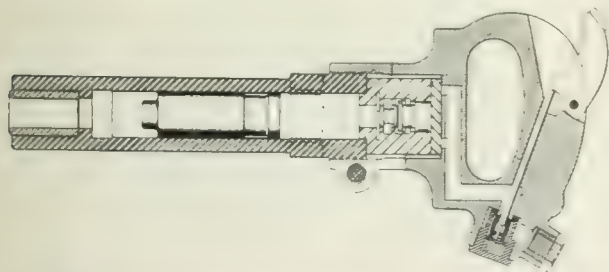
Sectional View of the Cleveland Steel Casting Chipping Hammer.
